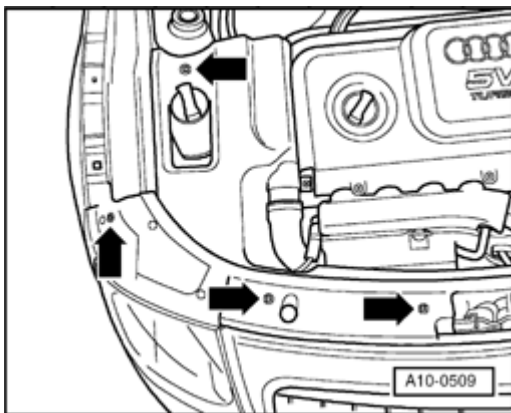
Removing Covers At Lock Carrier And Above Coolant Expansion Tank
